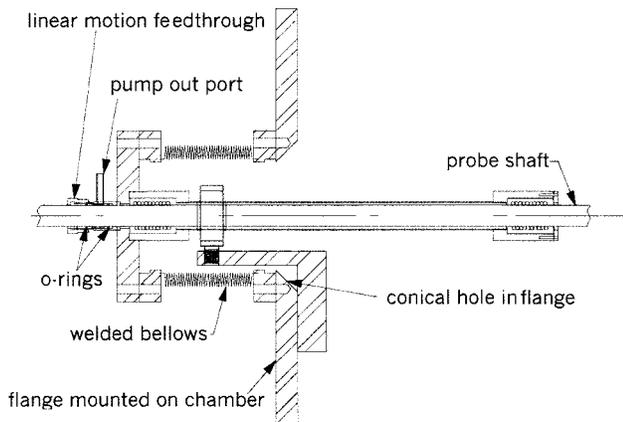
Mechanical drawing of the entire angular motion feedthrough assembly. The vacuum seal is made on the probe shaft at the linear motion feedthrough with a differentially pumped double O-ring seal. The exterior end of the probe shaft is terminated in a small, sealed chamber with optical and electrical feedthroughs.
